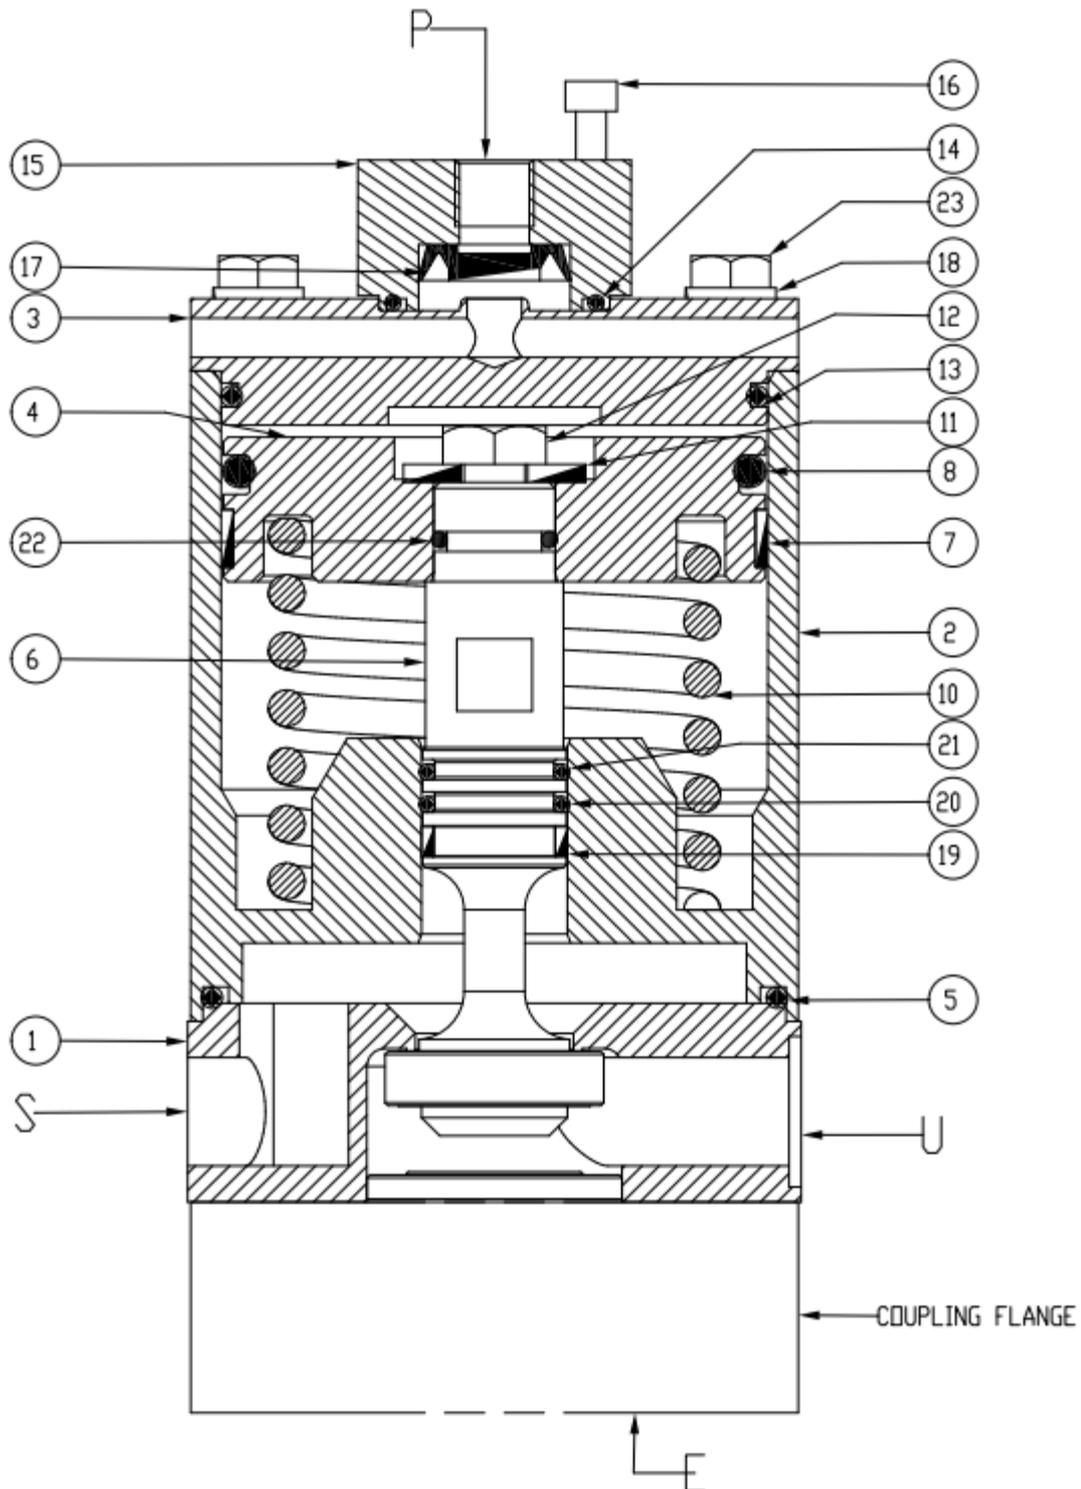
CO 3 way pneumatic valve size 1" ½: aluminum machining
